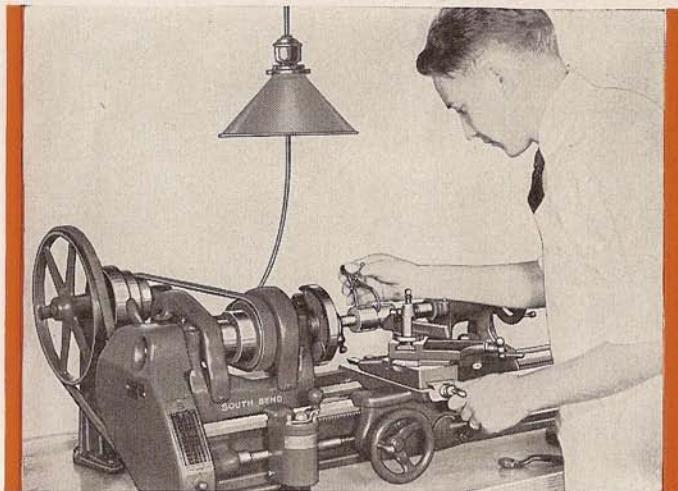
Making Bushings on a Mandrel in the "Workshop" Lathe.
